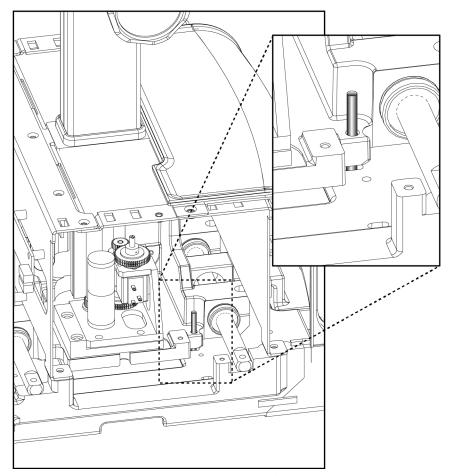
Dowel pin in center alignment hole for X-axis assembly
